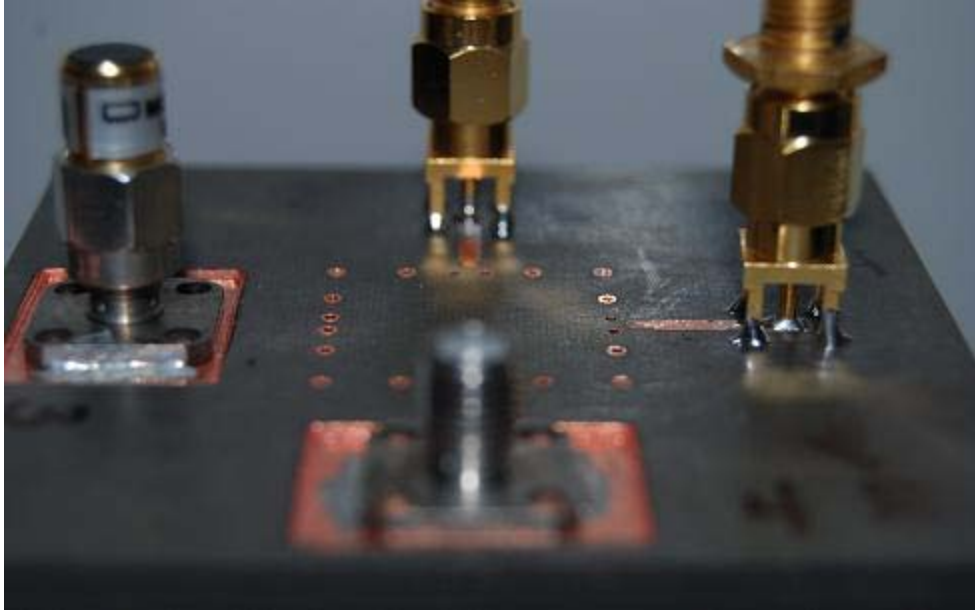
Bottom view of the constructed dual-band, dual-CP antenna element showing connector installation
